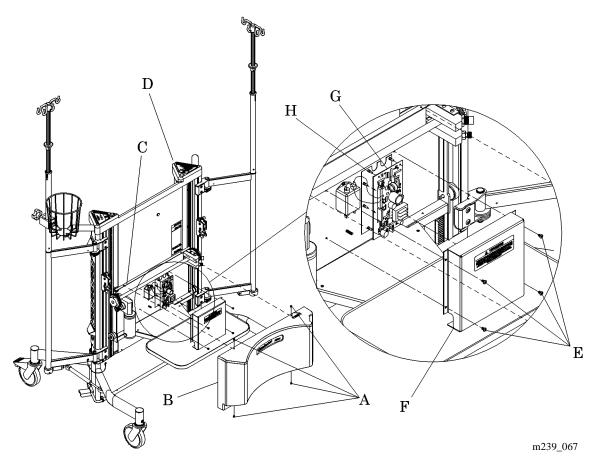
Printed Circuit Board Assembly (Motorized Shelf)
